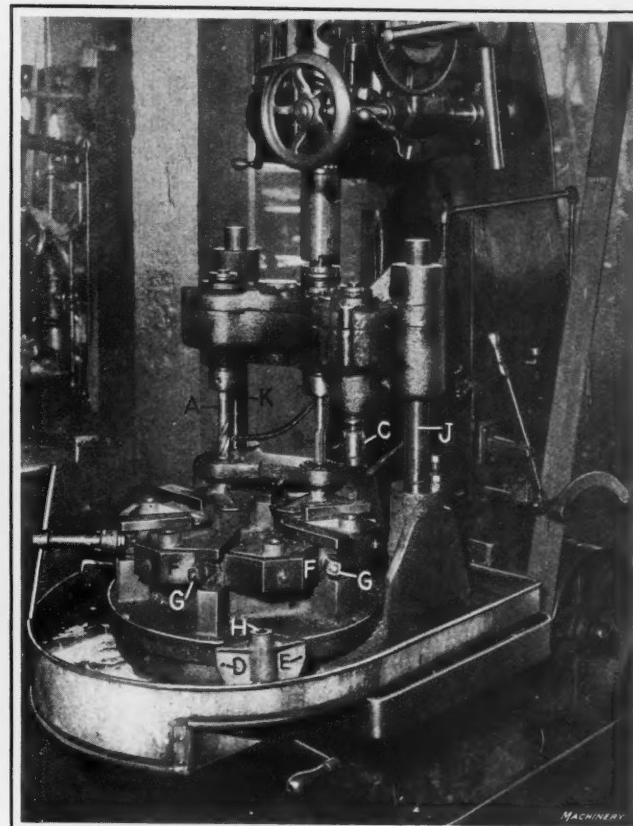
Baker Bros. High-duty Drilling Machine equipped with Indexing Fixture and Special Three-spindle Head for drilling, reaming and facing
